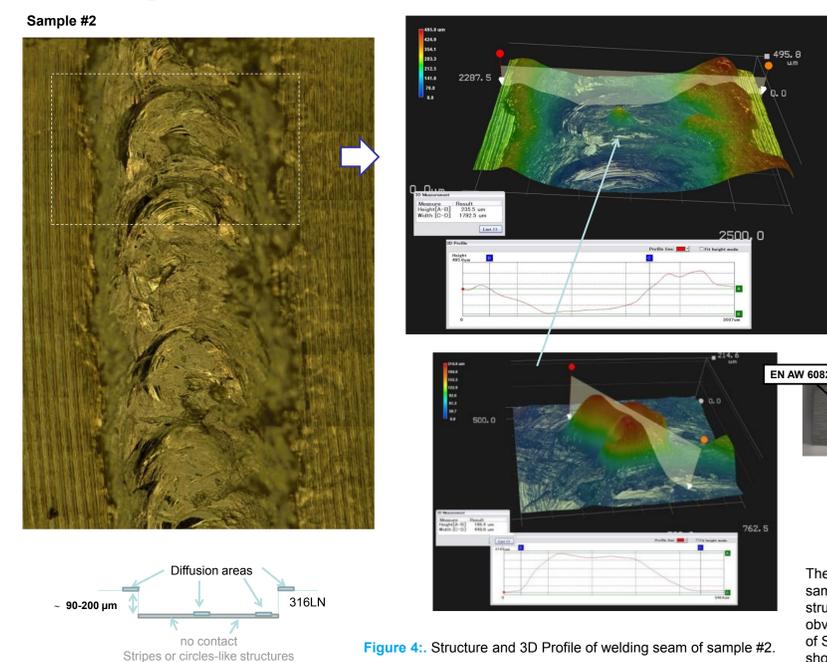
Structure and 3D Profile of welding seam of sample #2.
